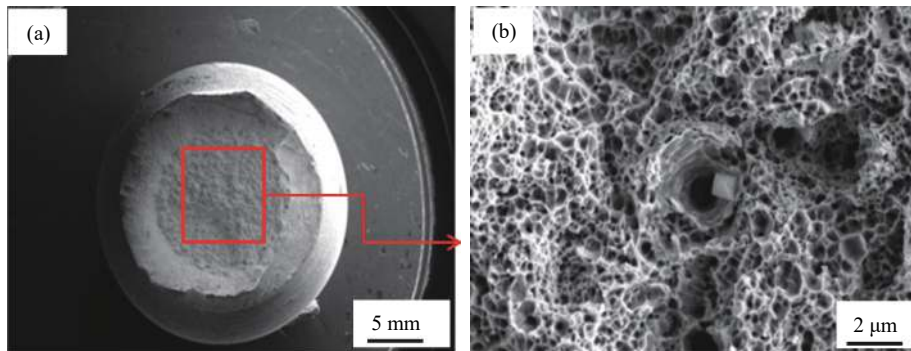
Fractographs of tensile fracture sample: (a) SEM image of failure sample; (b) magnified image.
